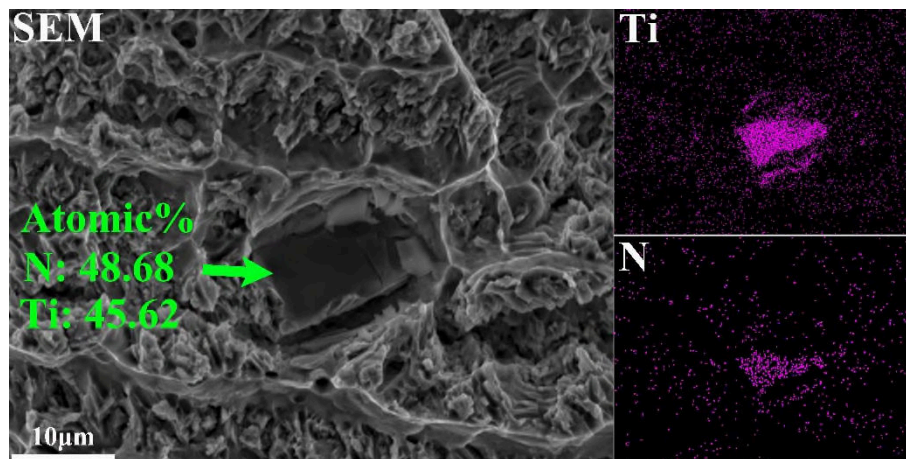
TiN inclusion found in the fracture surface of the WAAM IN718 built using Wire B.
